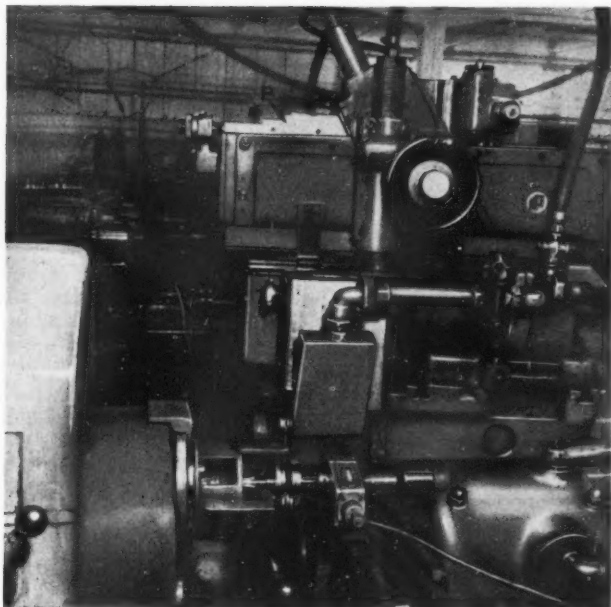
One of a Pair of Fortuna-Werke Cylindrical Grinding Machines, with Form-dressing Attachments, for Finish-grinding Five Surfaces on the Splined, and Six Surfaces on the Taper, End of the Sub-assembly
